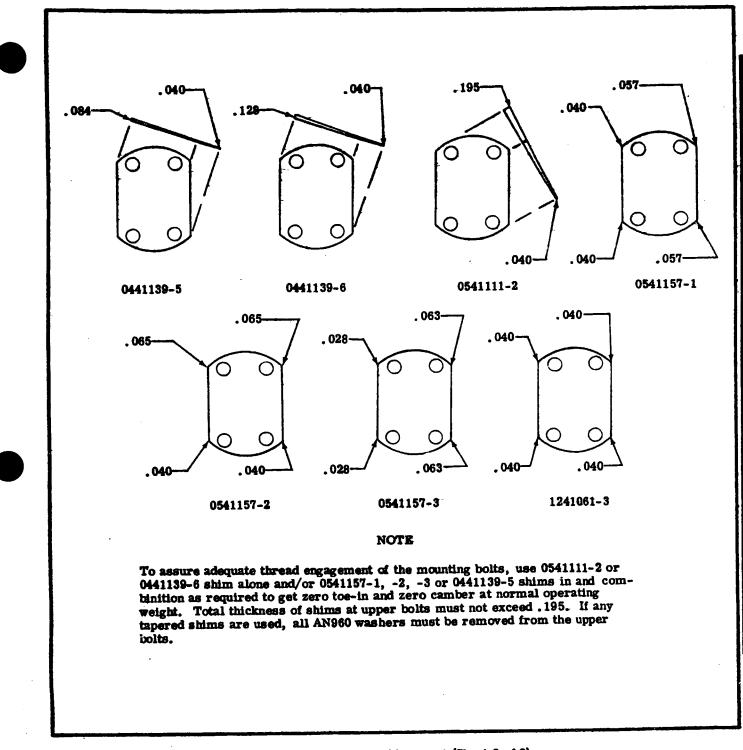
Wheel Alignment (Sheet 2 of 2)
